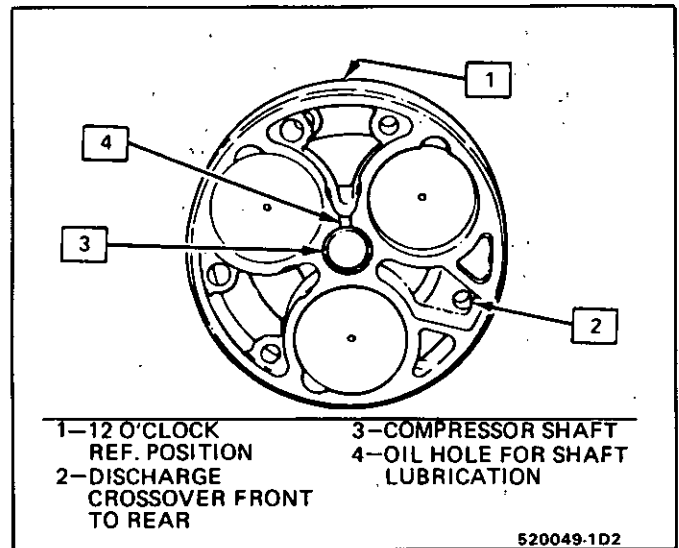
Rear View and Detail of DA-6 Cylinder and Shaft Assembly
